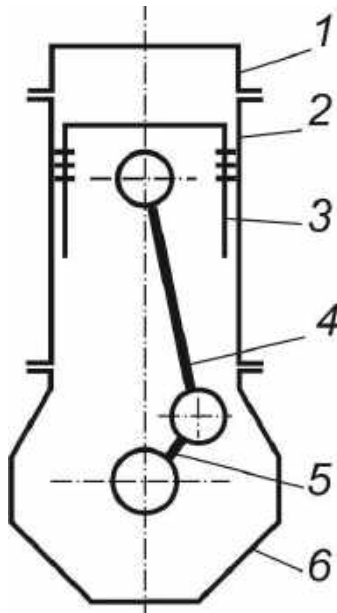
Generic scheme of a piston engine: 1 – cylinder head; 2 – cylinder (cylinder barrel); 3 – piston; 4 – connecting rod; 5 – crankshaft throw (crankshaft); 6 – crankcase
